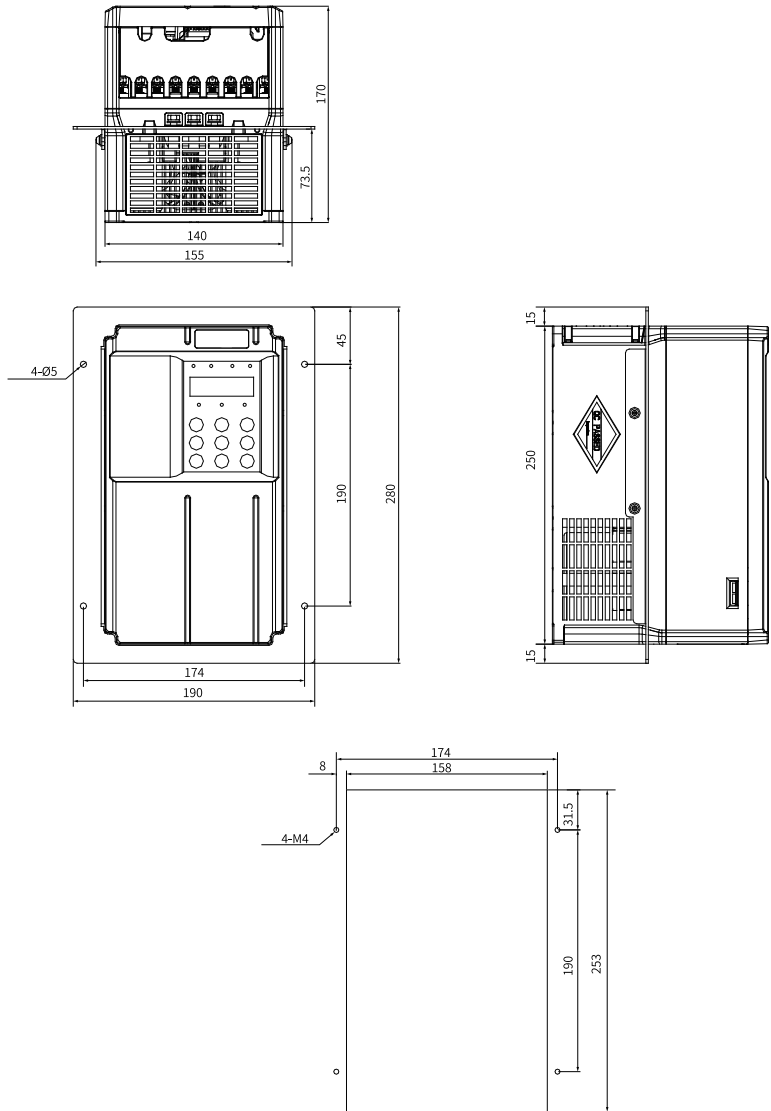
Dimensions of the MD500-AZJ-A1T3 bracket and mounting hole
